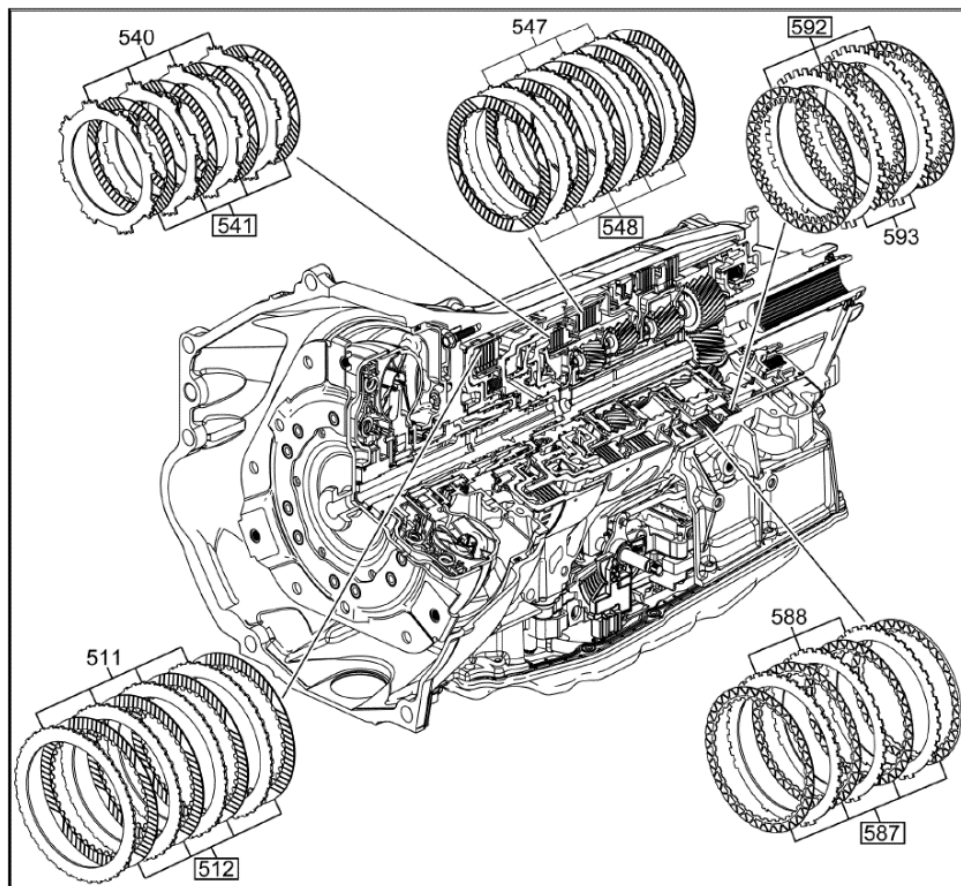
Cross-section of GM Hydra-matic 8-Speed Transmission with Exploded View of Clutch Packs.¹²¹
